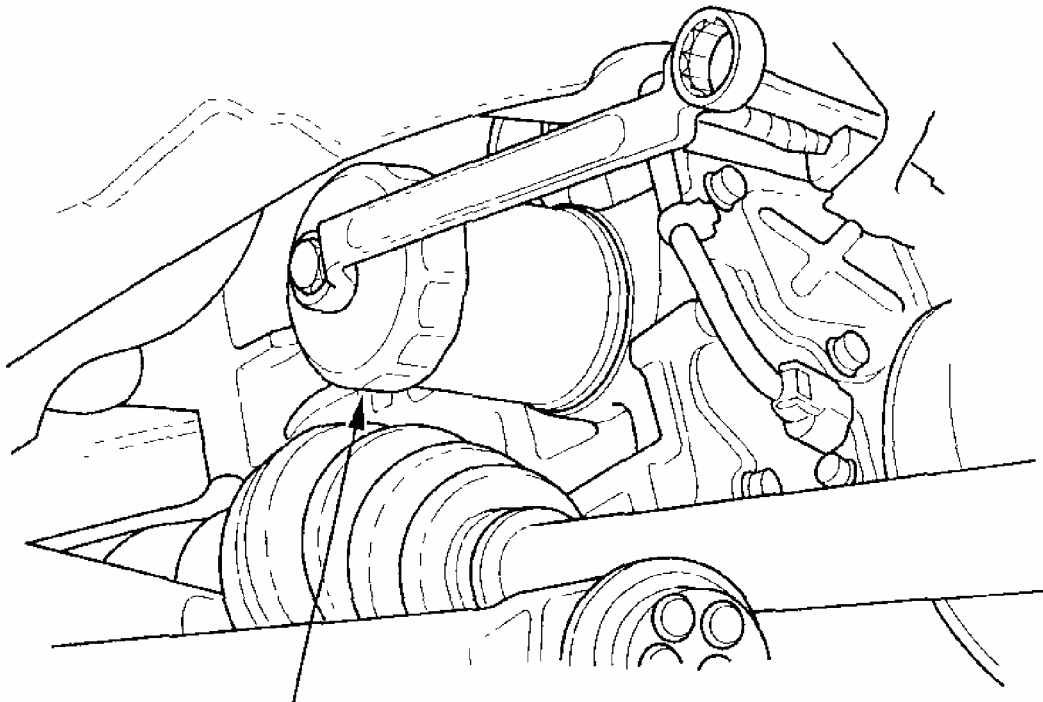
Inspecting Oil Filter Threads And Rubber Seal
